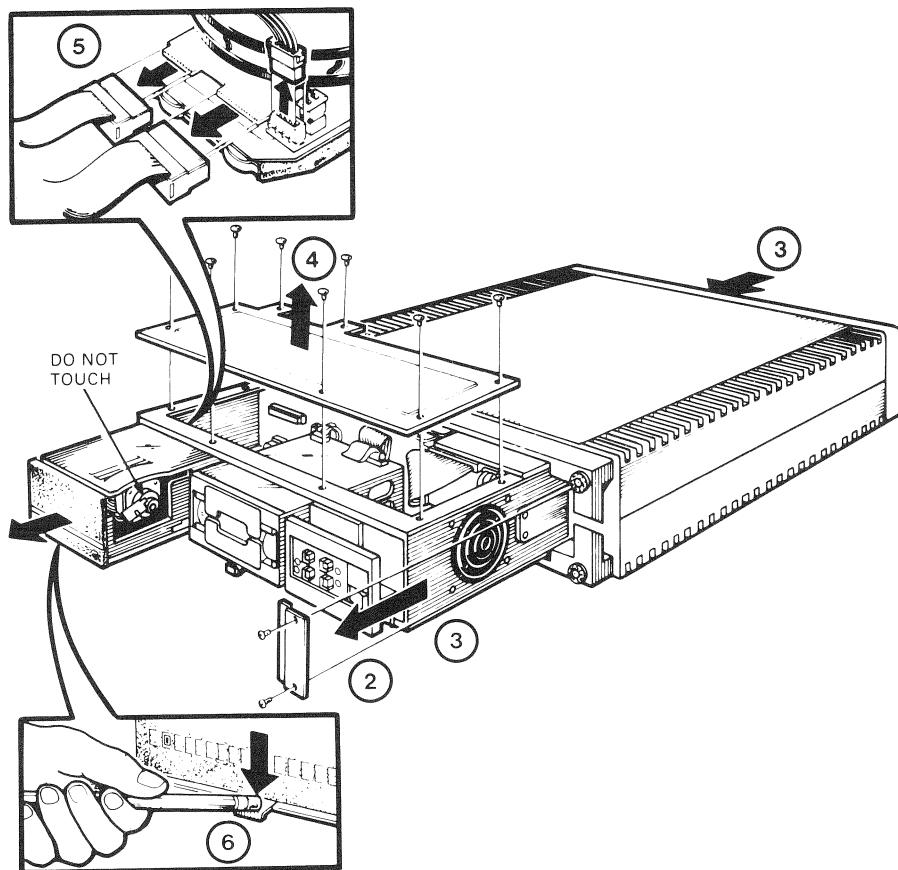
RD5n Fixed-Disk Drive Removal (RD51 Disk Drive Shown)
